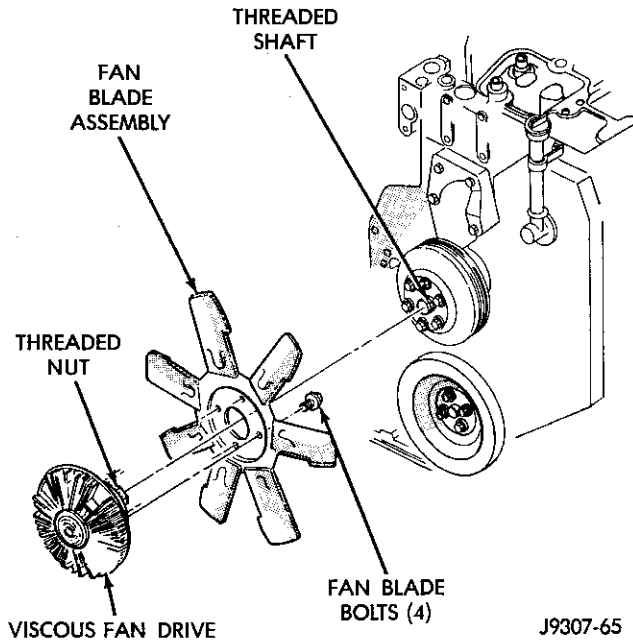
Fan Blades/Viscous Fan Drive—5.9L Diesel
